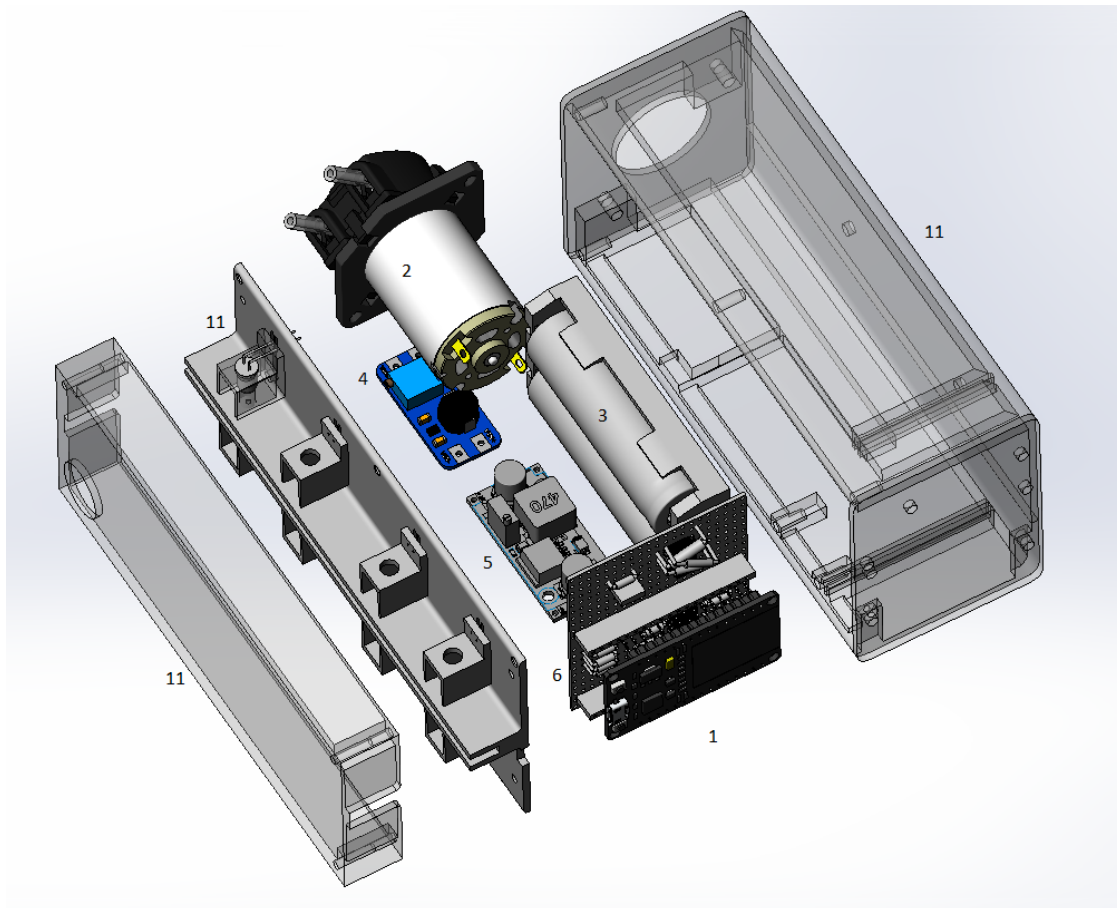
SolidWorks prototype. Shows the enclosure and components used
